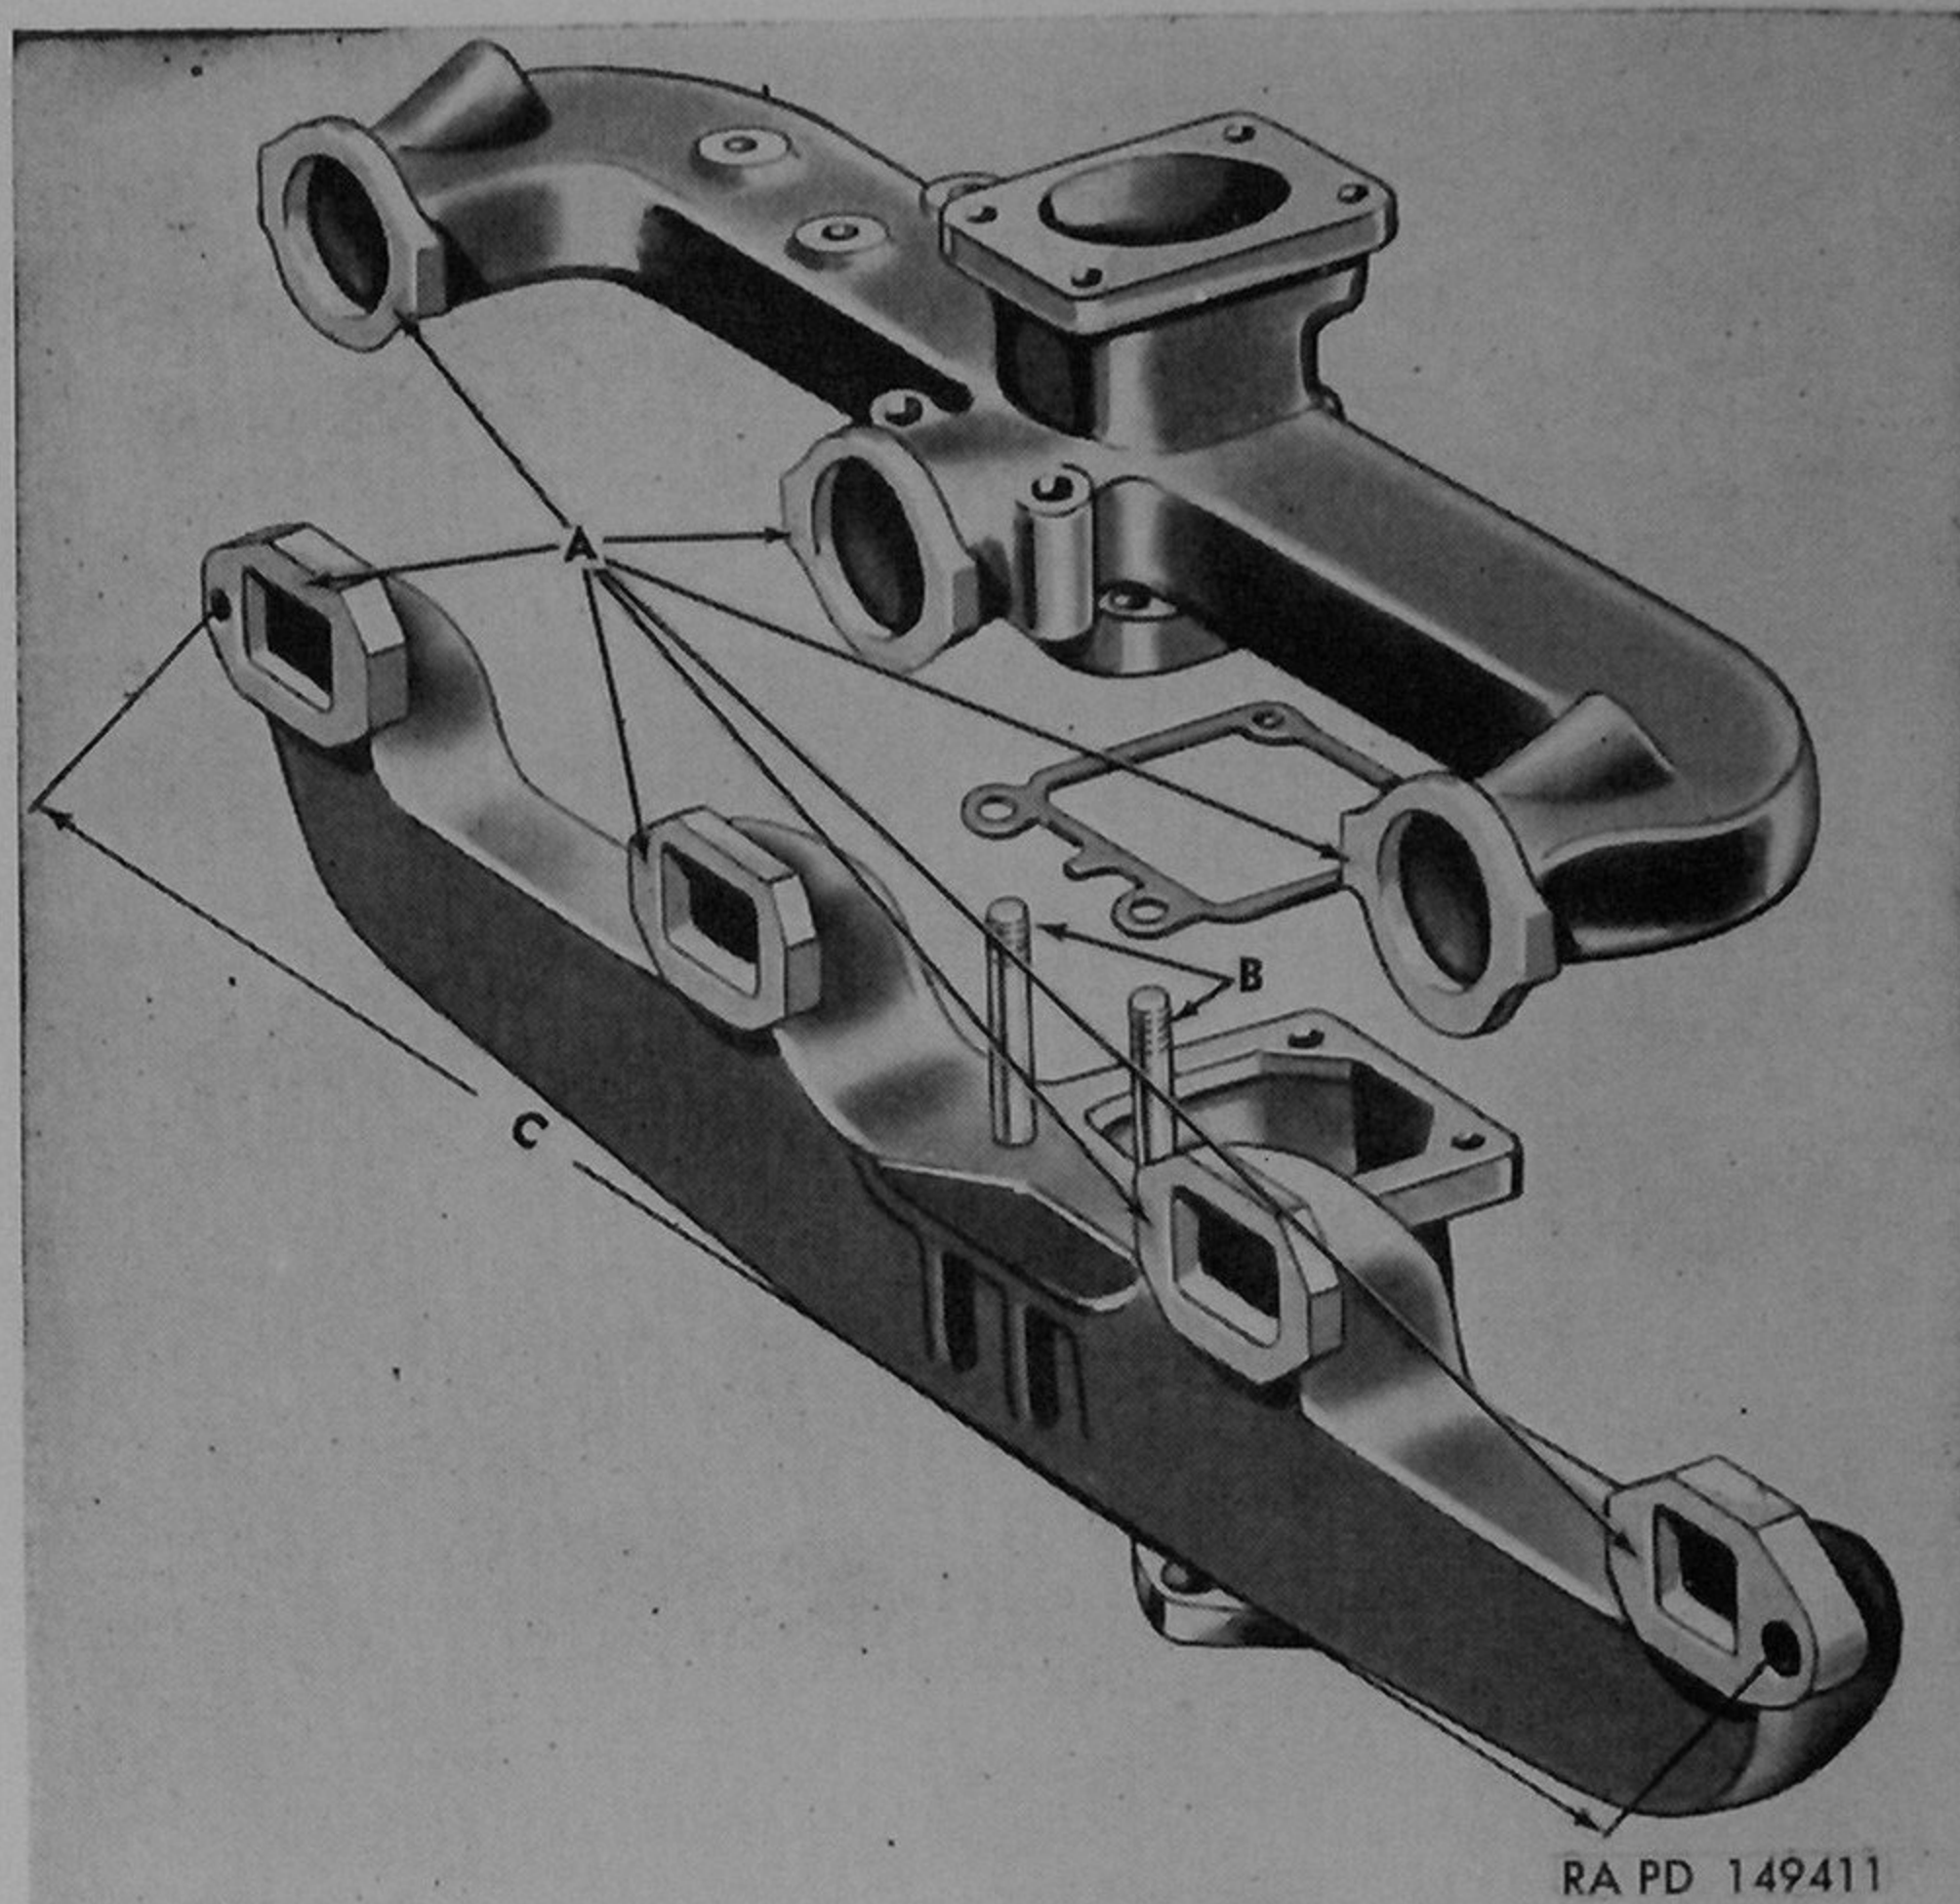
Repair and rebuild standard points of measurement for intake and exhaust manifolds (engine assemblies 7411599 and 8329440).
